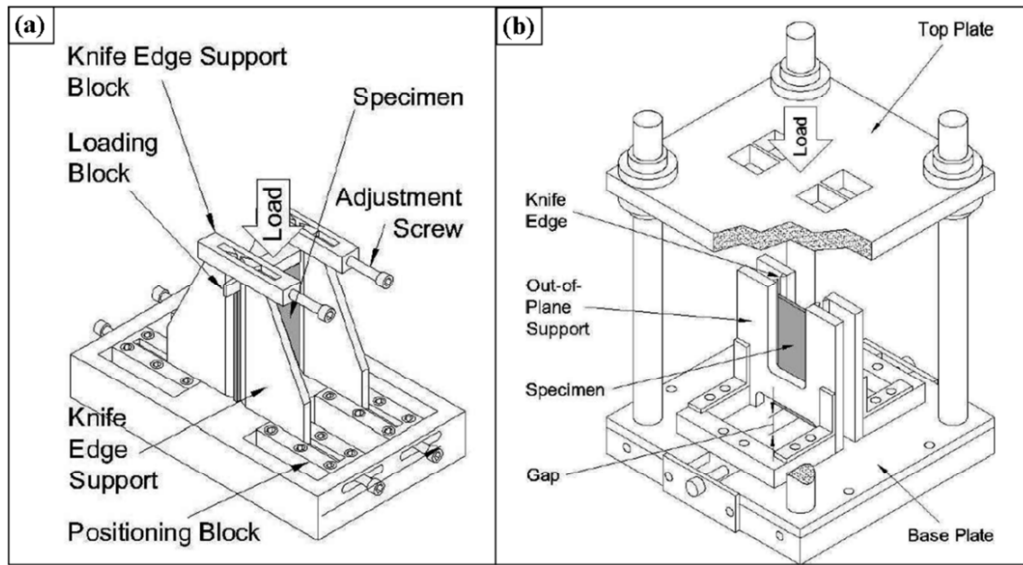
Crush test fixture design of (a) Savona and Hogg [SAV96] (b) Feraboli [FER08]
